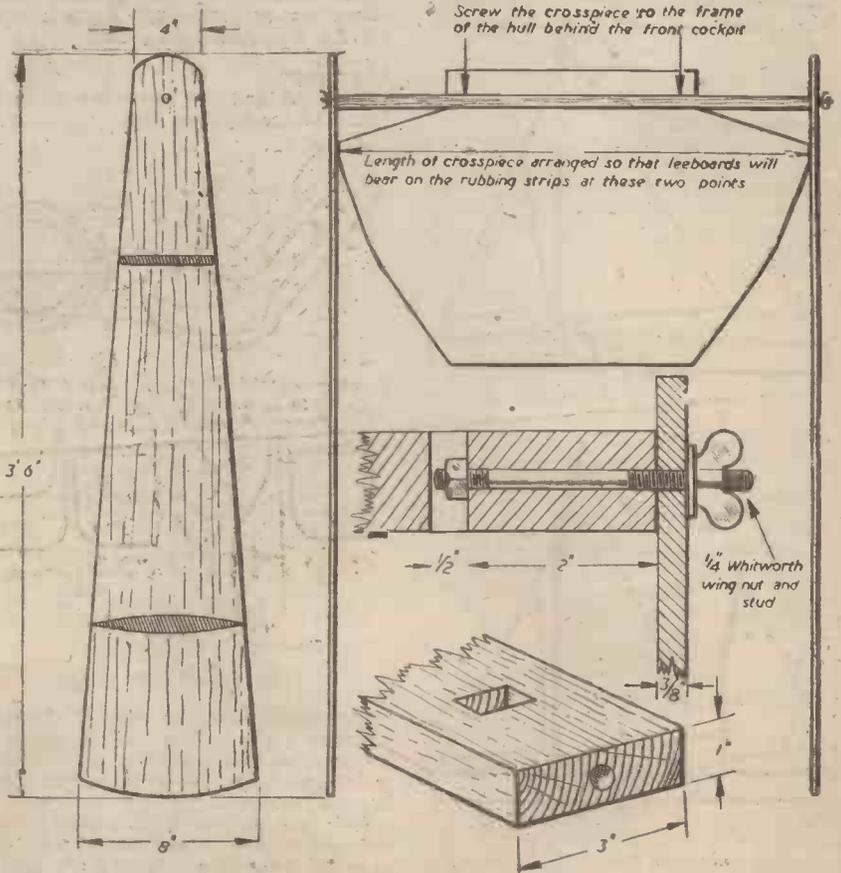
Dimensions of lee-boards, and details of construction and disposition.
